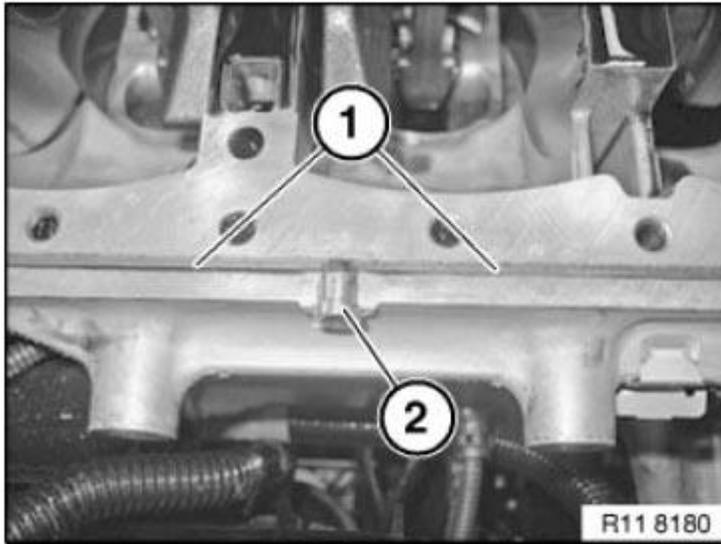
Identifying Injector Nozzle And Sealant Residue
